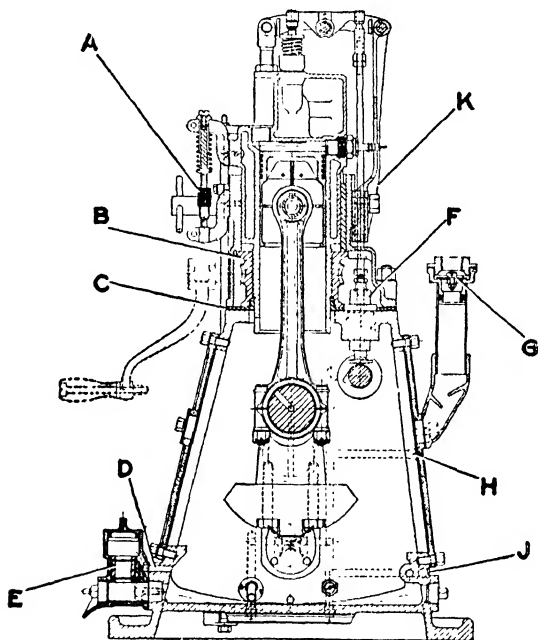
SECTIONAL VIEW OF C.F.R.-A.S.T.M. ENGINE.
